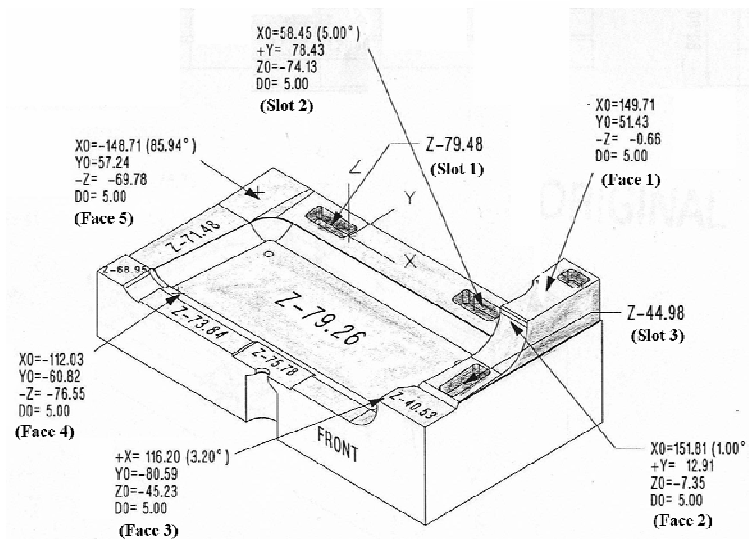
Main Cavity of Injection Mould Assembly 4490 (4 pieces)
